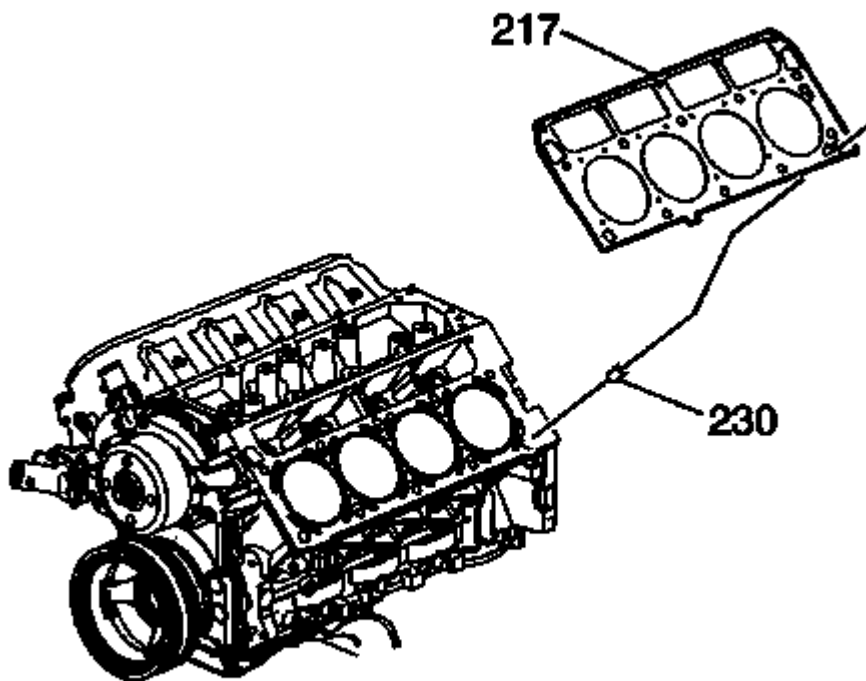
View Of Cylinder Head Gasket & Locating Pins
